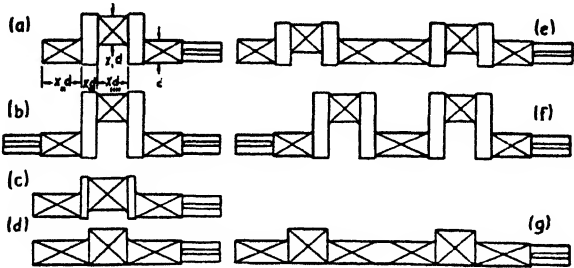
Single- and double-crank type, semi-eccentric type and eccentric type, single and twin drive shafts.
